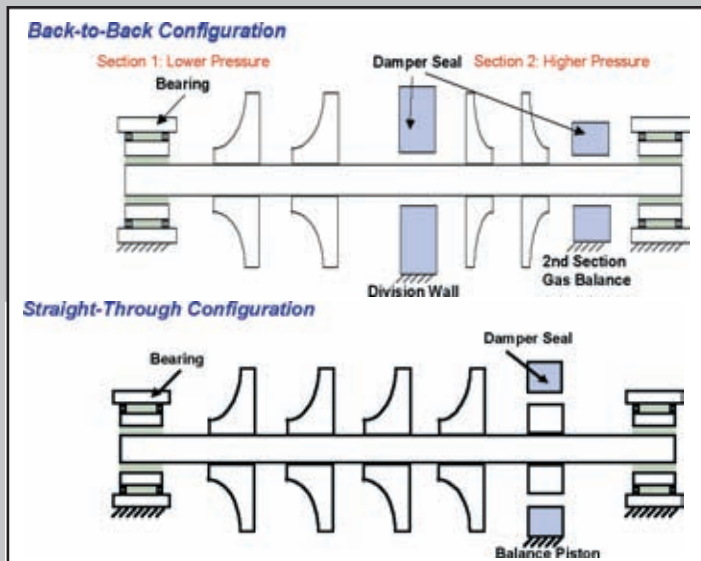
Back-to-Back and Straight-Through Centrifugal Compressors with Damper Seals
